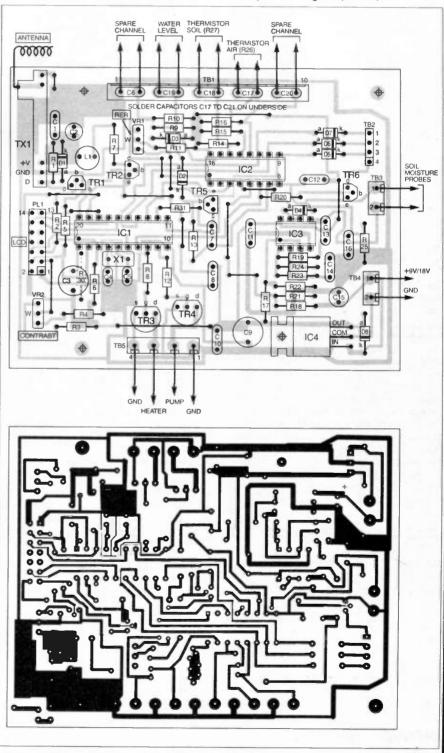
Printed circuit board component layout, wiring details and full size copper track master for the control board. Note R30 is soldered to underside.
